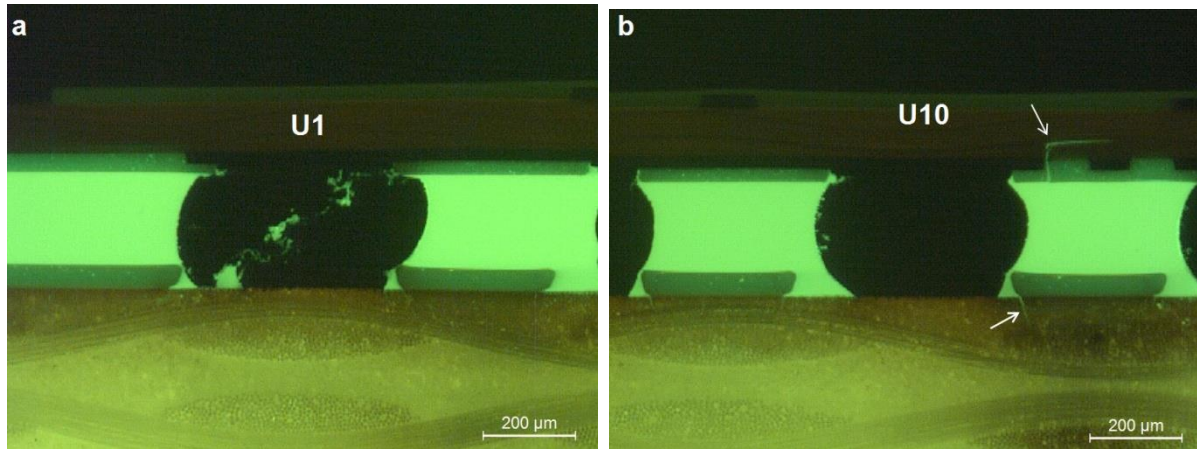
Cross-sections of solder joints a) U1 and b) U10 in the outer row of solder joints to a BGA208 with SAC305 solder joints showing cracks in the PCB and BGA laminates.
